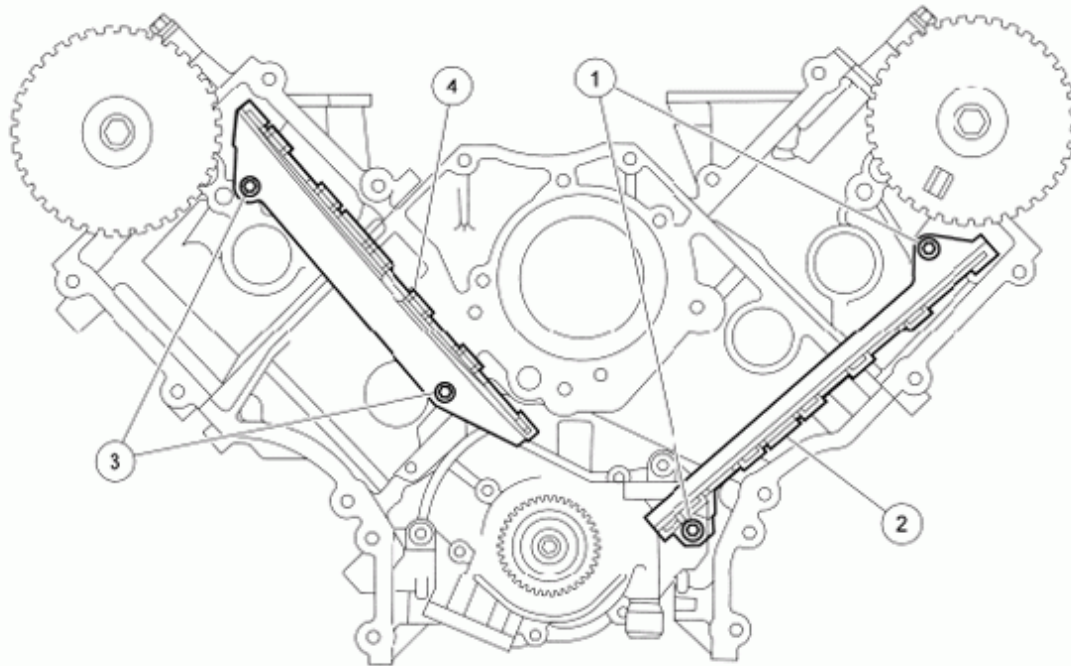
Identifying Timing Chain Tensioner Arms And Bolts
